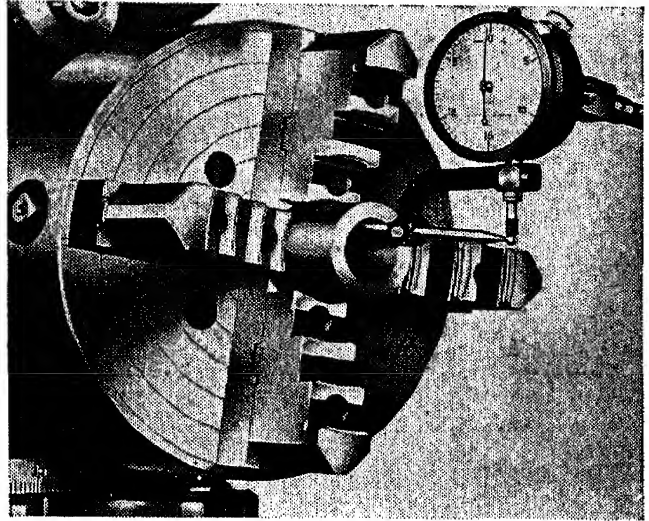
A dial indicator with an attachment for checking the run-out of the bore of a piece held in a chuck. (Courtesy Brown and Sharpe Mfg. Co.)
